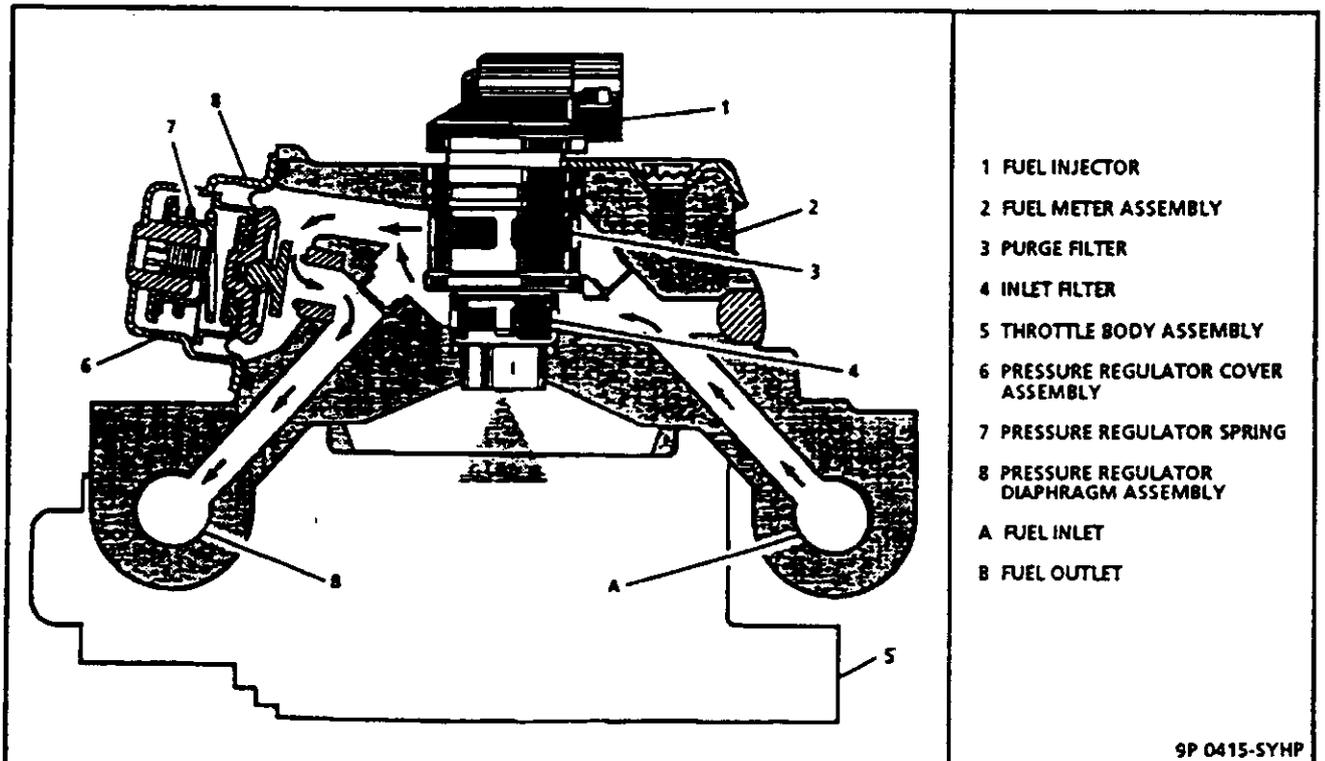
Fuel injector and Pressure Regulator, Shown in the Fuel Meter Assembly
